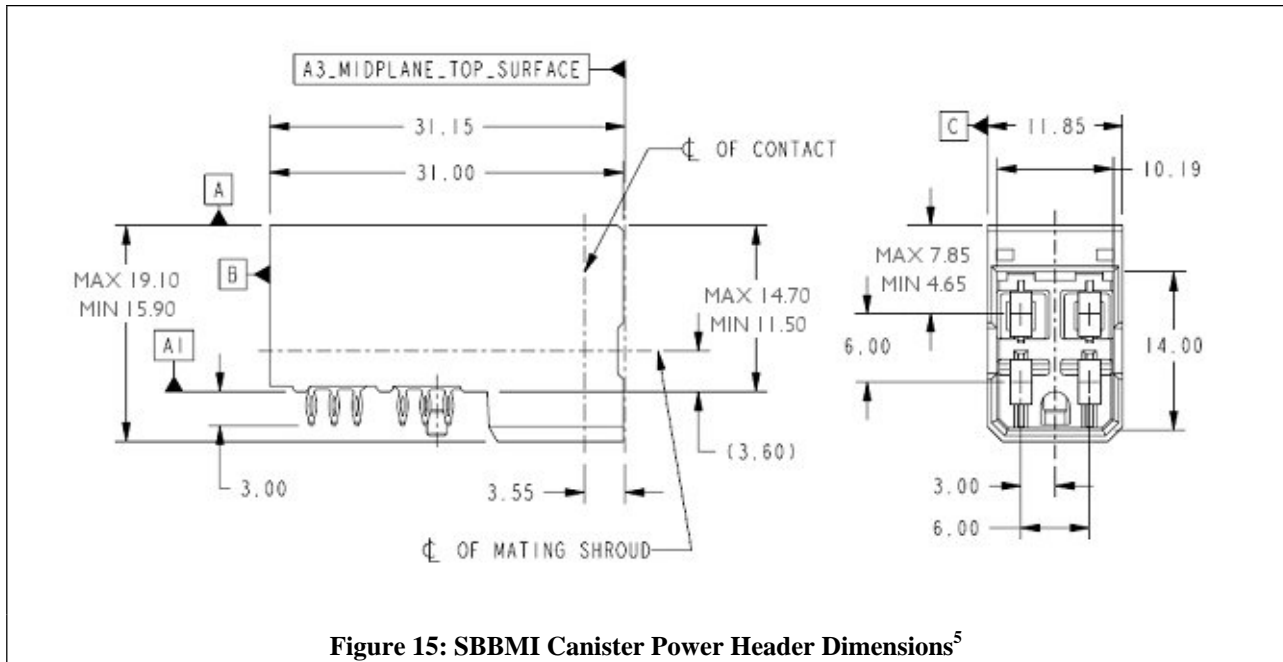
SBBMI Canister Power Header Dimensions<sup>5</sup>
